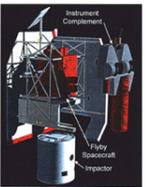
Primary Components of the Deep Impact Flight System (Exploded View)¹²
